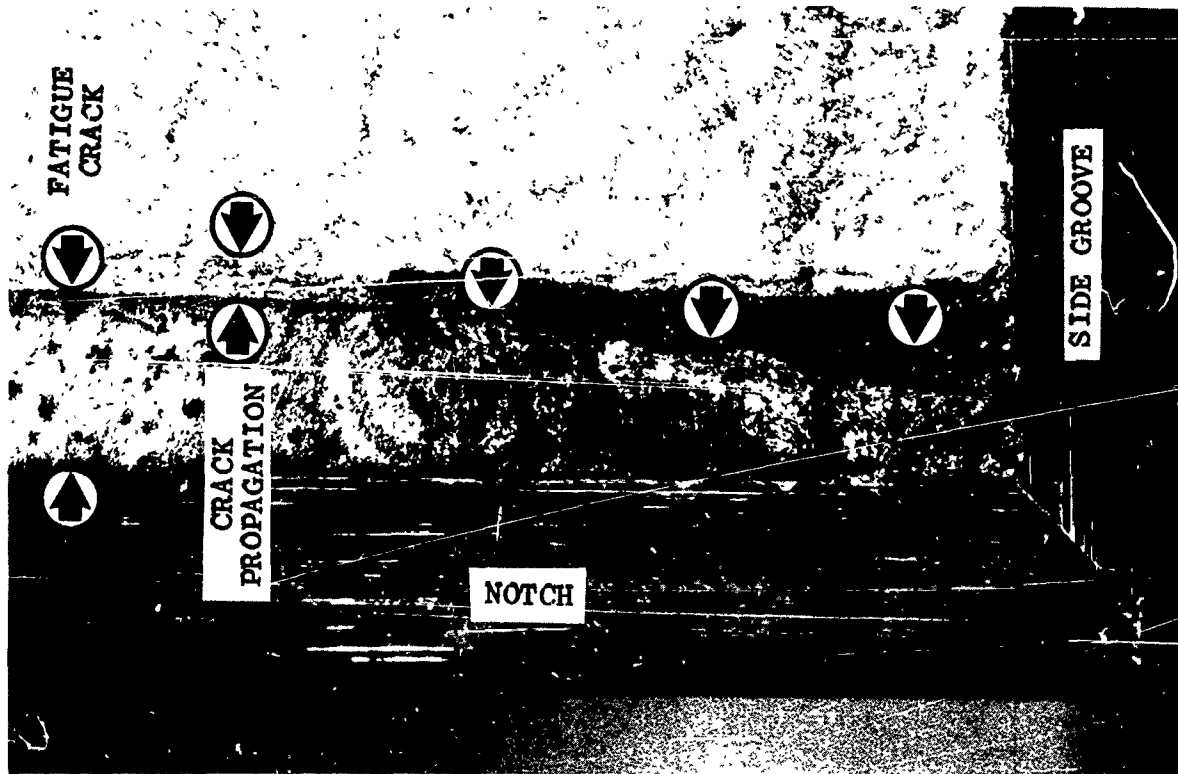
Fracture surface of specimen BL-14 showing secondary cracks below the three arrows on the right. 15X.
